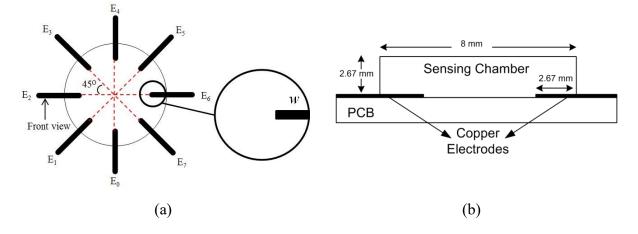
The sensing chamber and sensor array (a) Top View (b) Front View
